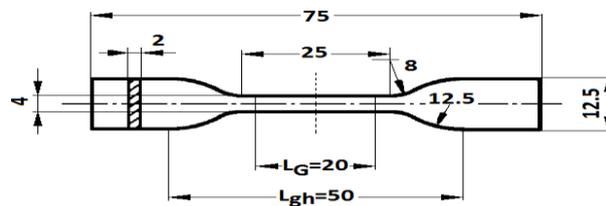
Dimension of dumbbell specimen [ISO 527 (5A)]
